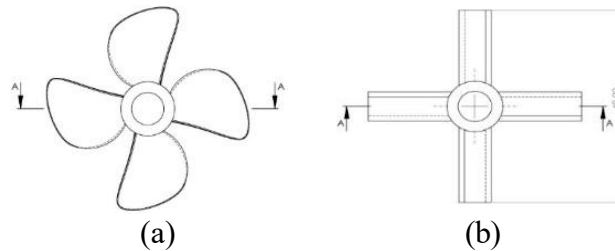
Types of Impeller Used (a) 4-Blade Propeller and (b) 4-Pitched Blade Turbine
